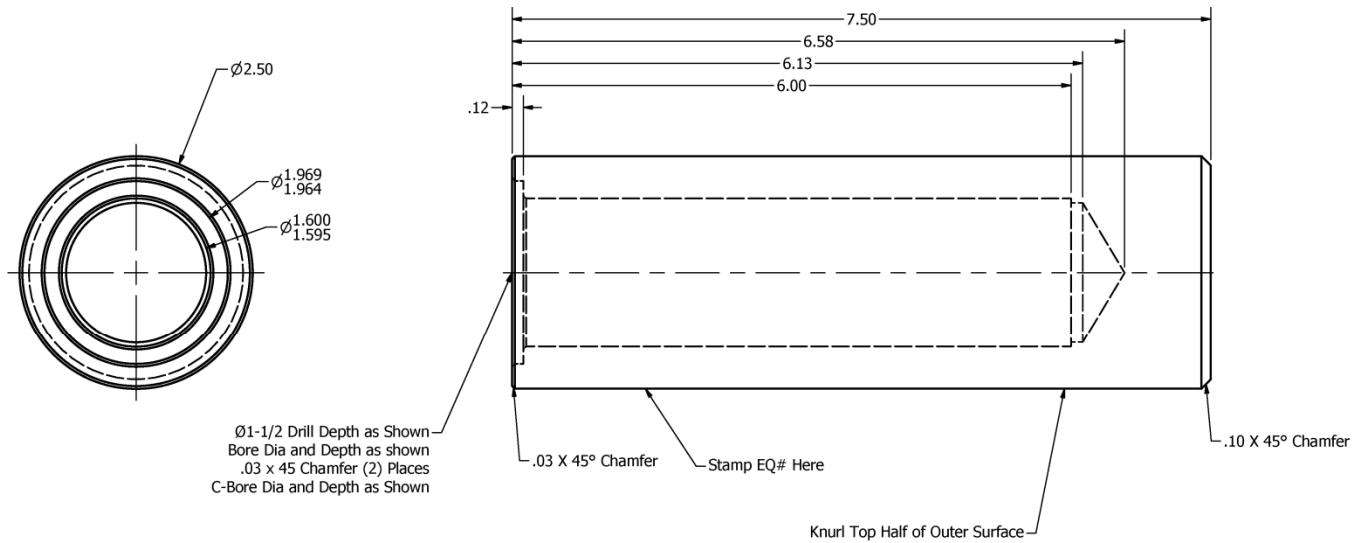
ASSEMBLY GUIDE FOR RINGS
